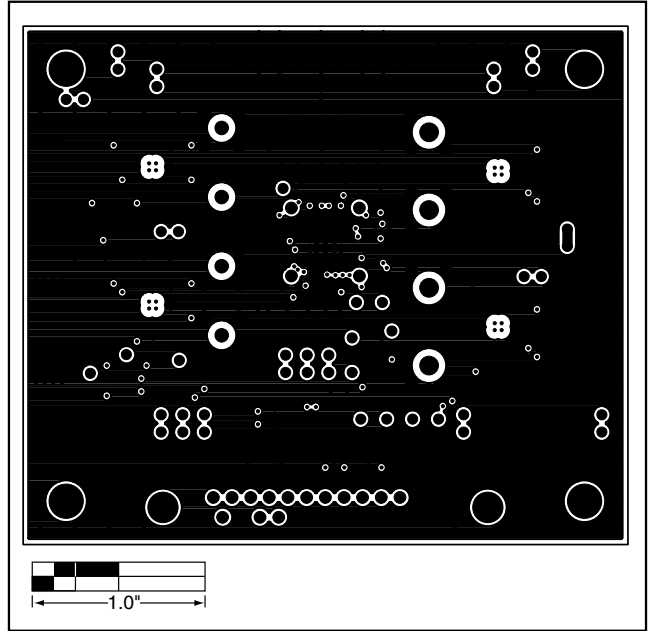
MAX2820/MAX2821 EV Kits PC Board Layout—Inner Layer 2
